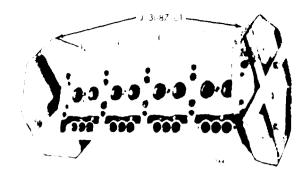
B-29. Cylinder Head Holding Plates-J 3087-01
